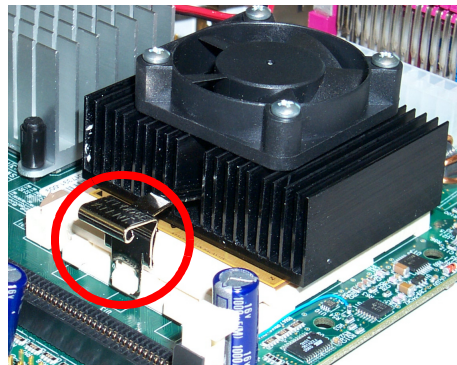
Heatsink Clip Connected to Back of Processor Socket
